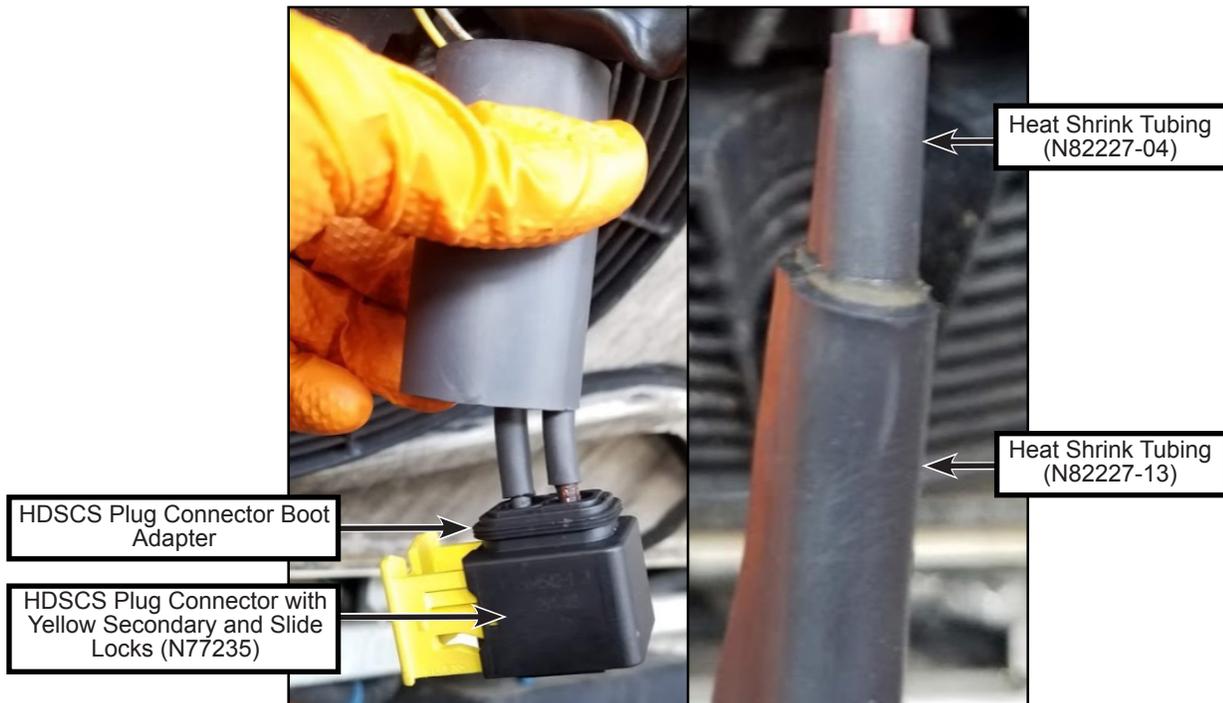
Heat Shrink Tubing Installation on HDSCS Plug Connector Wiring at Fan Side
